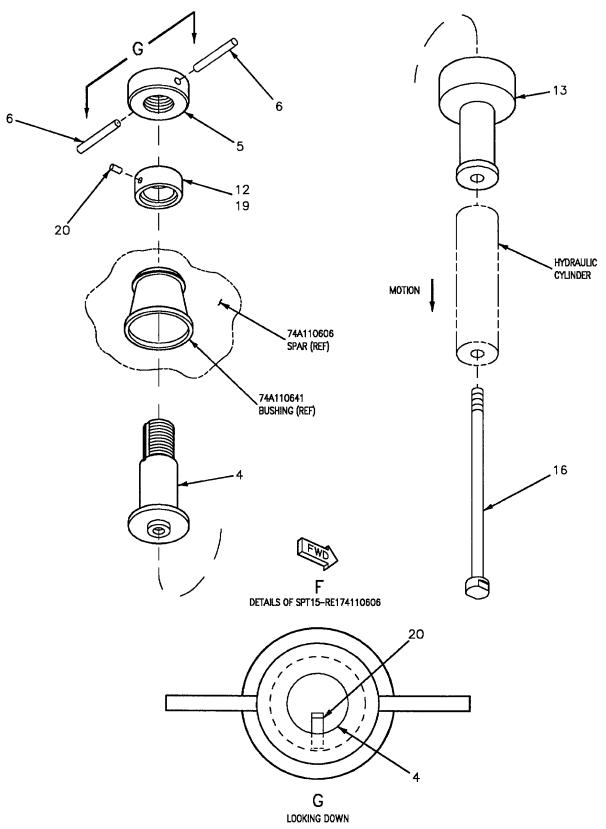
Removal of Pylon Post Bushings (Sheet 4)
